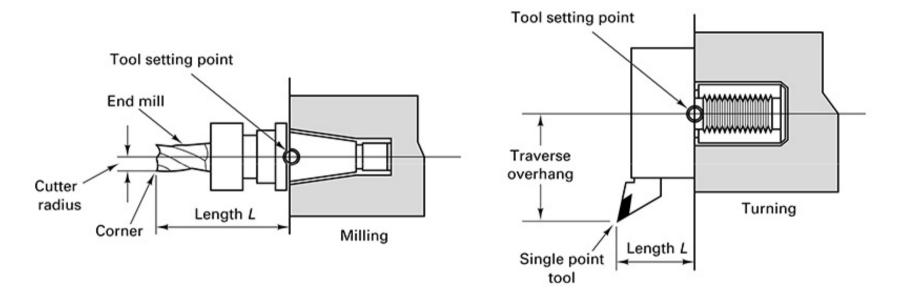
The location of the corner of the end mill (left) or the tip of a single-point tool (right) must be known with respect to the tool setting points so that tool dimensions are accurately set.
